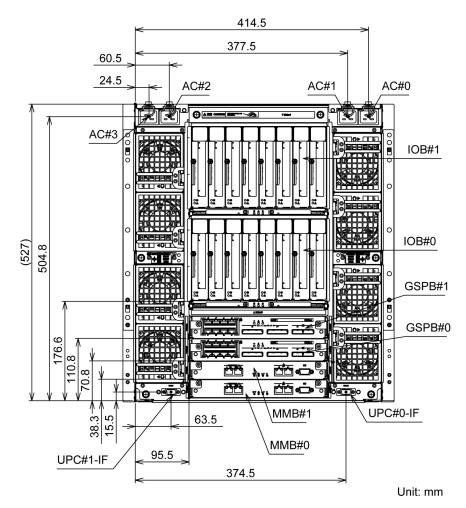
External interface connectors in the PRIMEQUEST 1800E2/1800E main unit (rear view)
